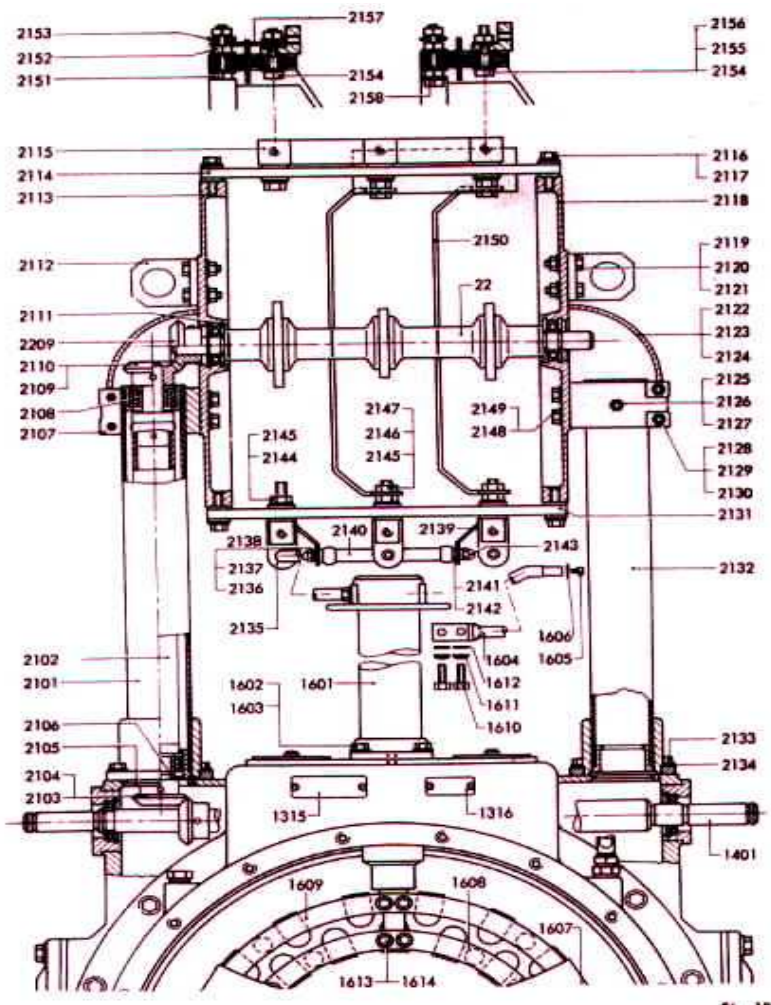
CIRCUIT BREAKER ASSEMBLY
